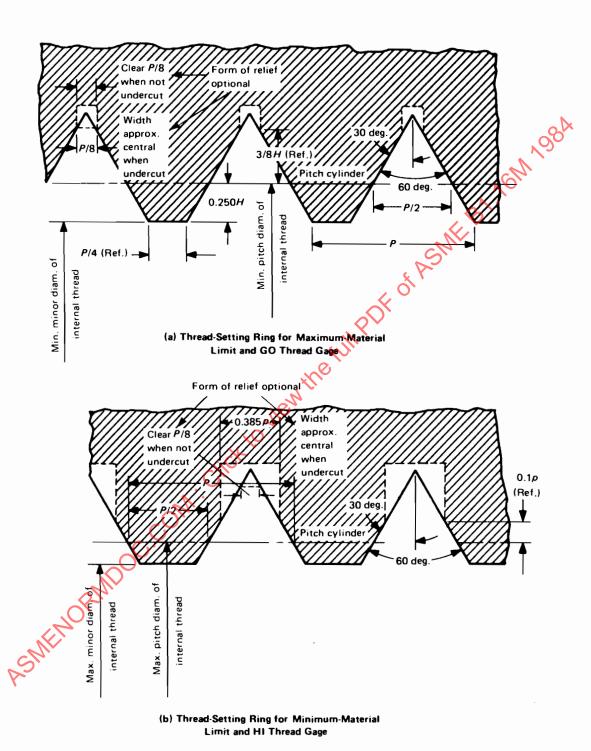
THREAD FORM OF SOLID THREAD-SETTING RING GAGES
